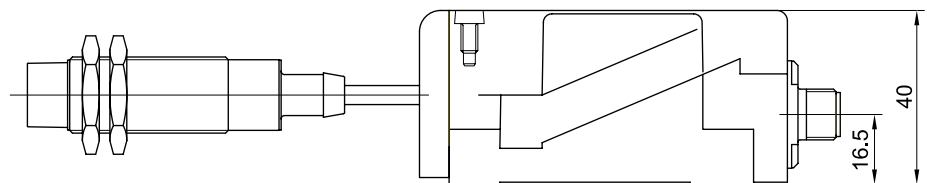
BIS L-400-043-002-02-S115 processor dimensions
